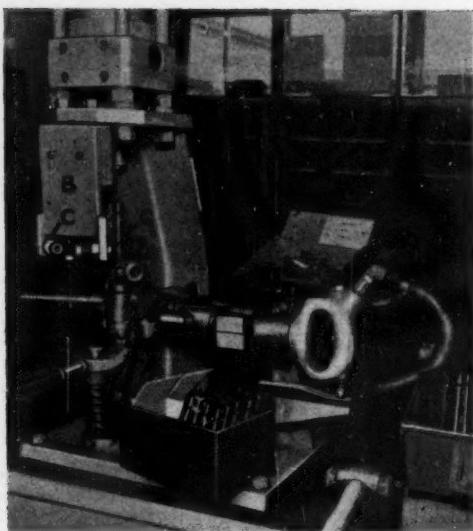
On this Semi-automatic Rig, an Assembly is Completed in a Floor-to-floor Time of 0.8 min. The Stub-axle Assembly is Clamped Pneumatically and the King-pin is Inserted by an Air-Ram
